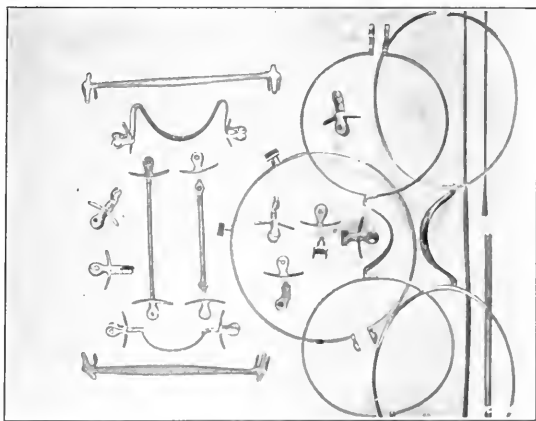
Examples of Eyeglass Parts joined by Electrical Soldering
